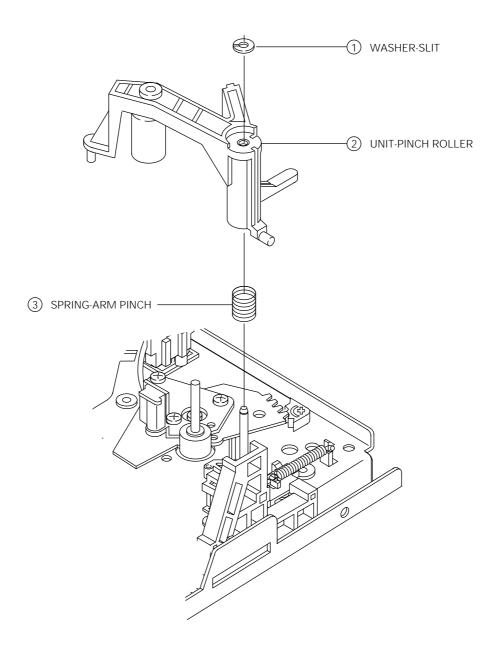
Unit Pinch Roller Ass'y Removal
